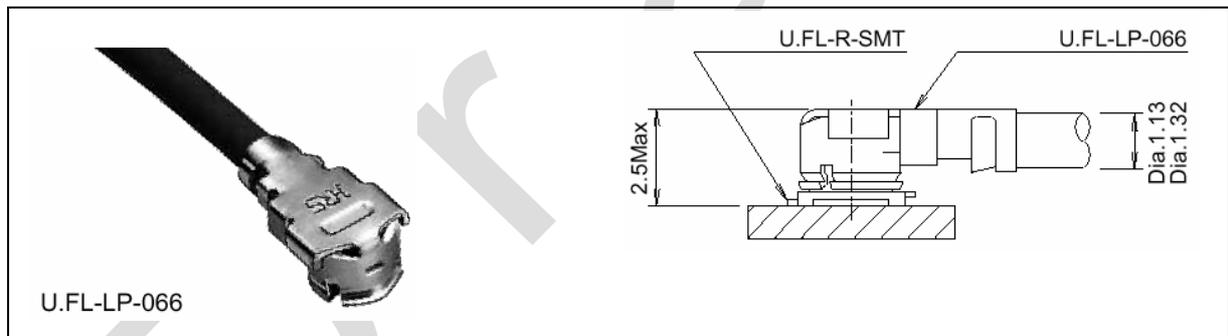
U.FL-R-SMT connector with U.FL-LP-066 plug
